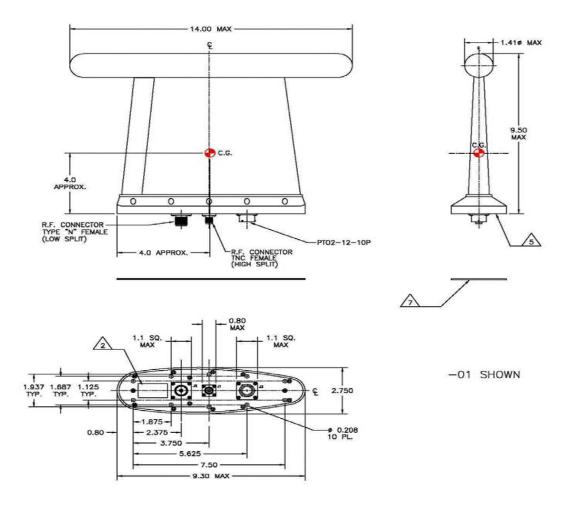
AT-550 Envelope Drawing (Sheet 1 of 1) Dwg No. 121-017850, Rev H
